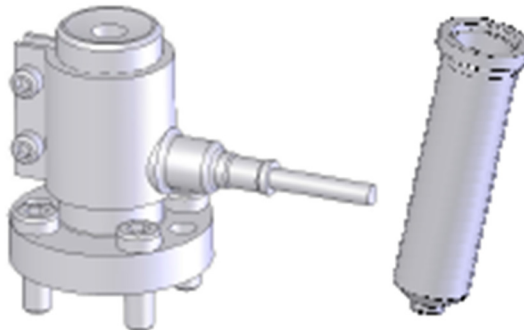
Heated sprue bushing and Gate bushing (DS, Standard Components, 2008)
